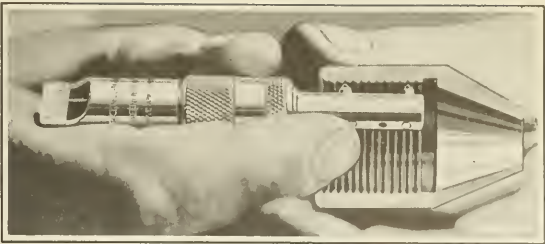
Thread Lead Indicator in Use testing an Internal Thread
